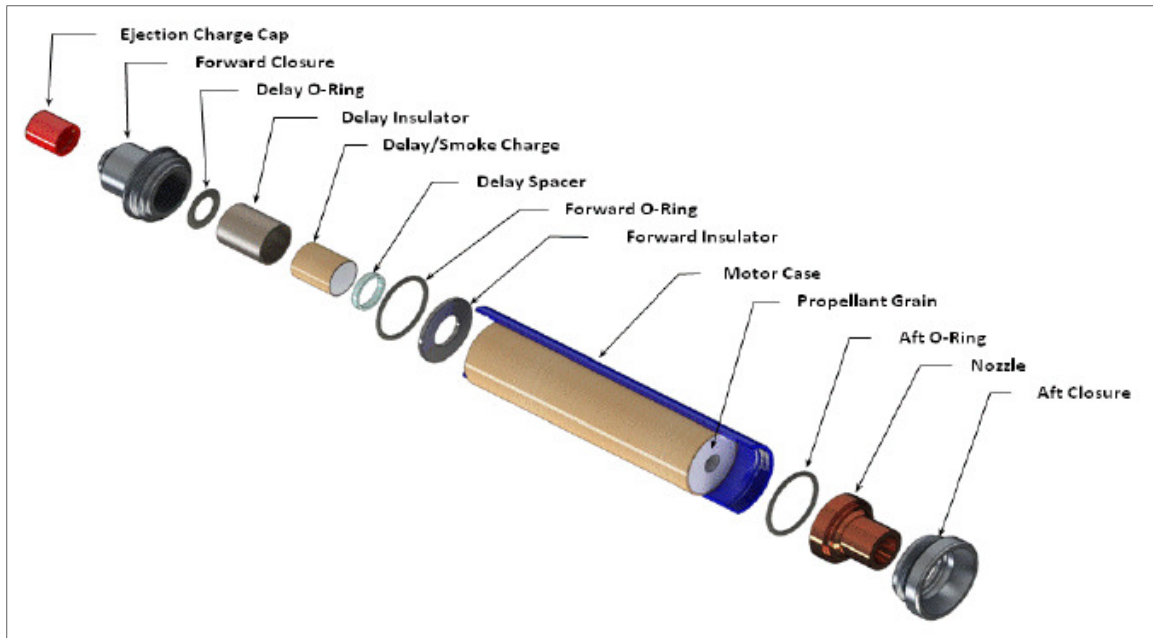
Exploded View of the G138 Hobby Rocket Motor
